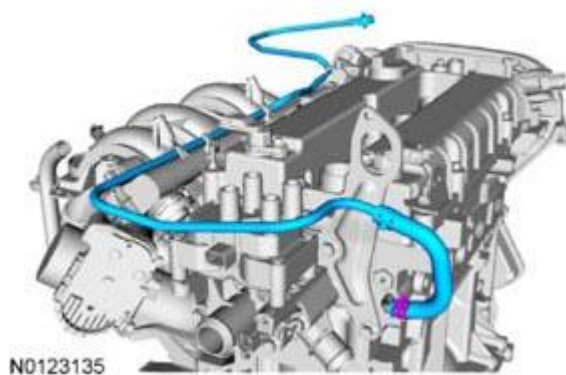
Identifying Coolant Tube To Fuel Rail Retainers
